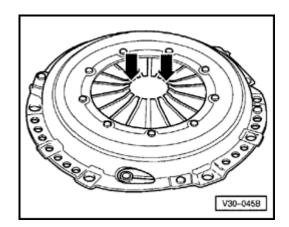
Centering clutch plate and removing and installing pressure plate
